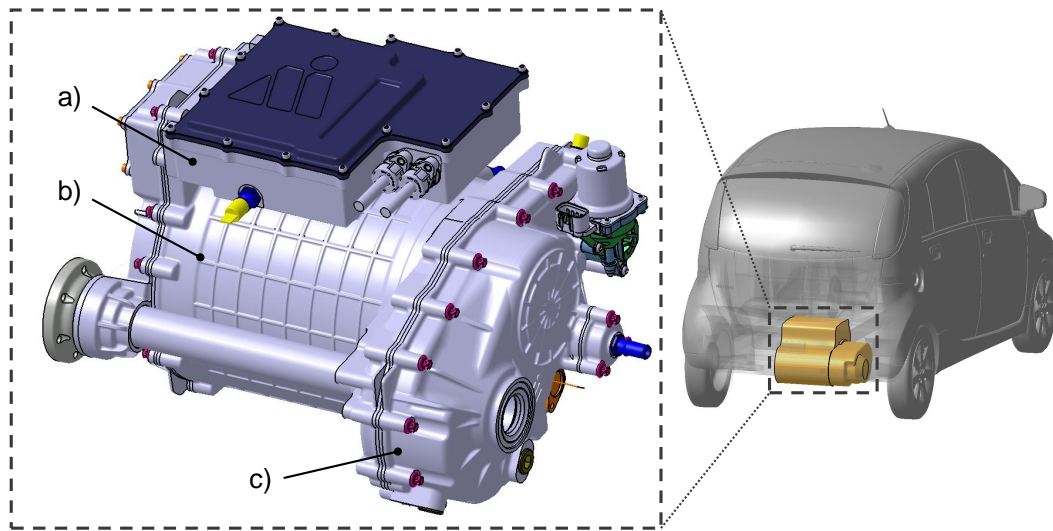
CAD-visualization of an e-drive; a) power electronics unit, b) electric machine, c) gearbox
